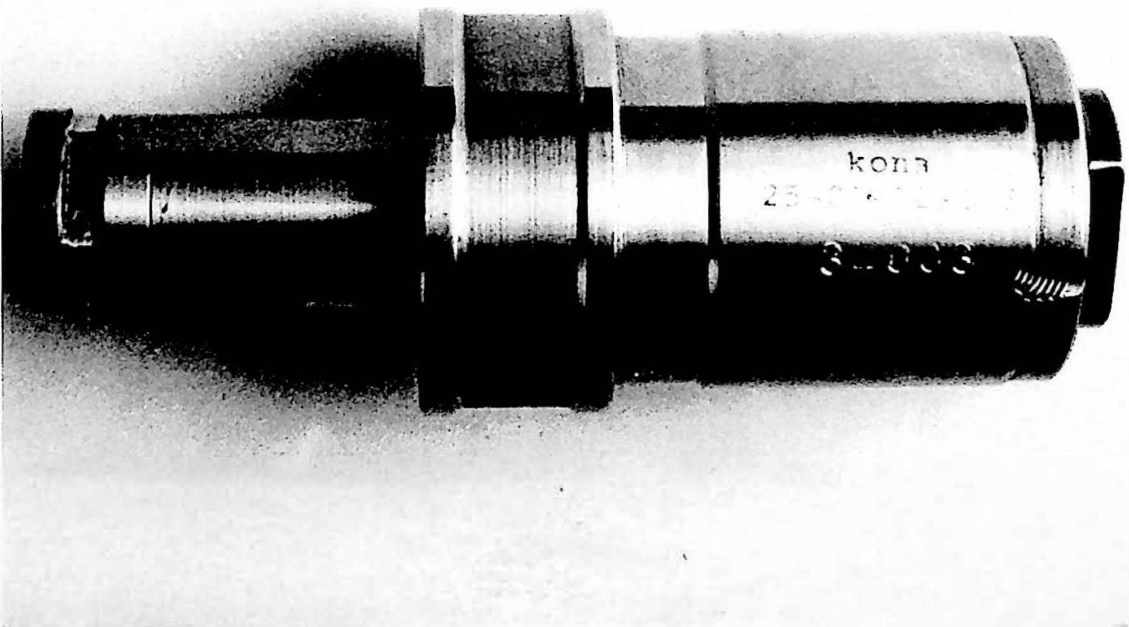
Hot sprue bushing ('hot tip') for beaker tool
